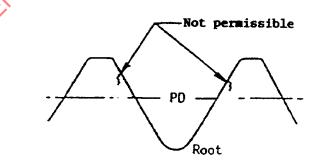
Laps Above PD Extending Toward Root, Rolled Thread
